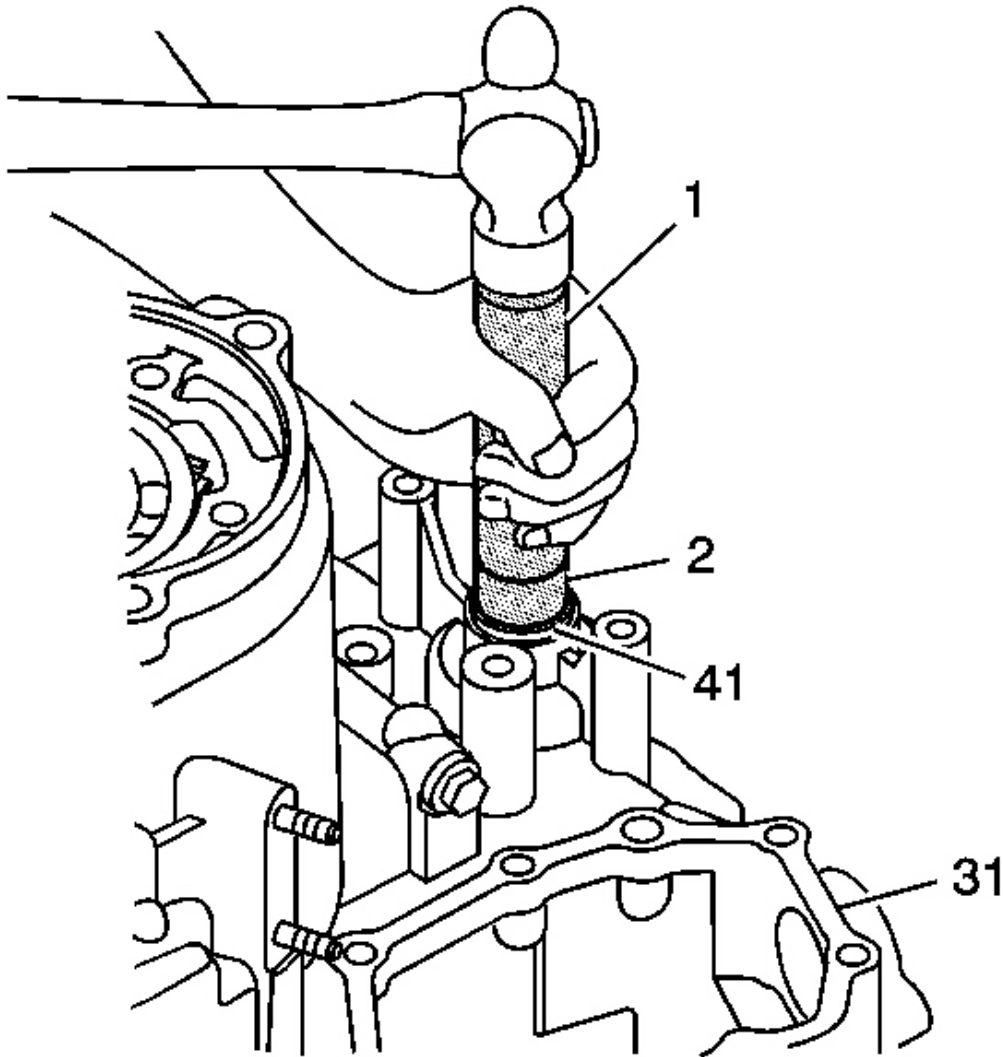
Installing Manual Shift Shaft Seal Using DT 46516 & EN 46342
